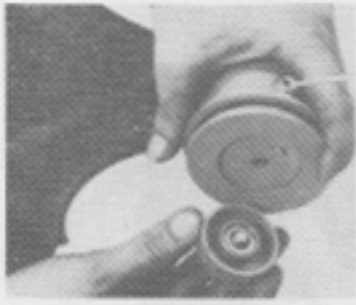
Hold outer spool with one hand and unscrew bump knob in counterclockwise direction. Inspect bump knob to be sure it can freely move axially on the captured bolt.
